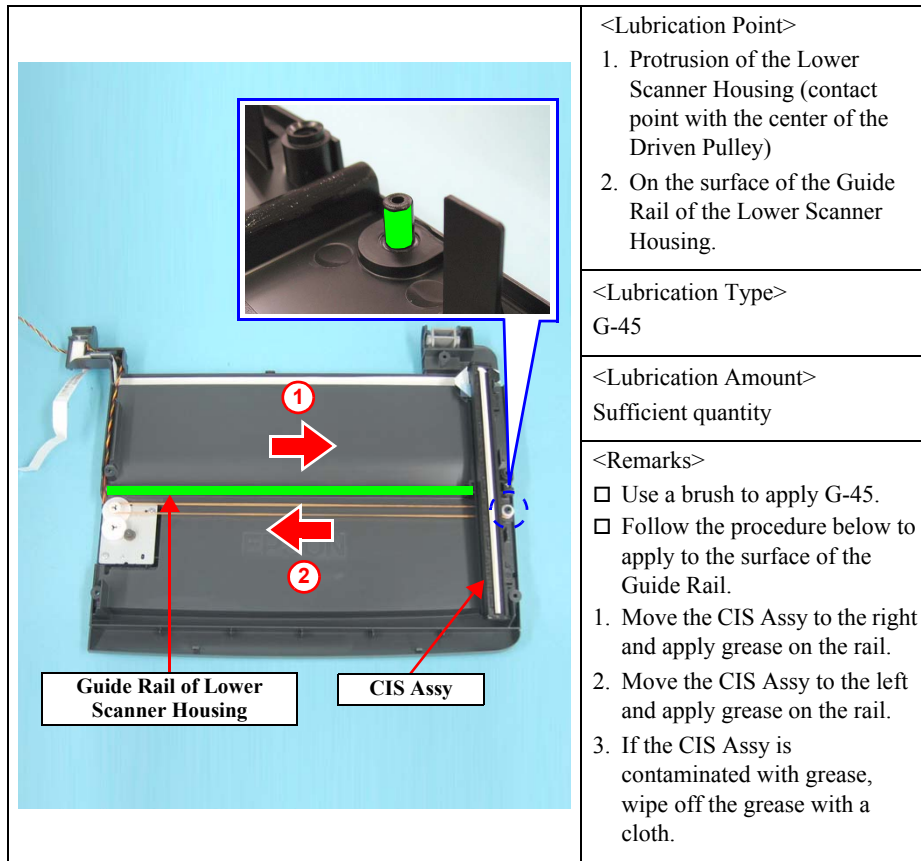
Lubrication on the Guide Rail of the Lower Scanner Housing
